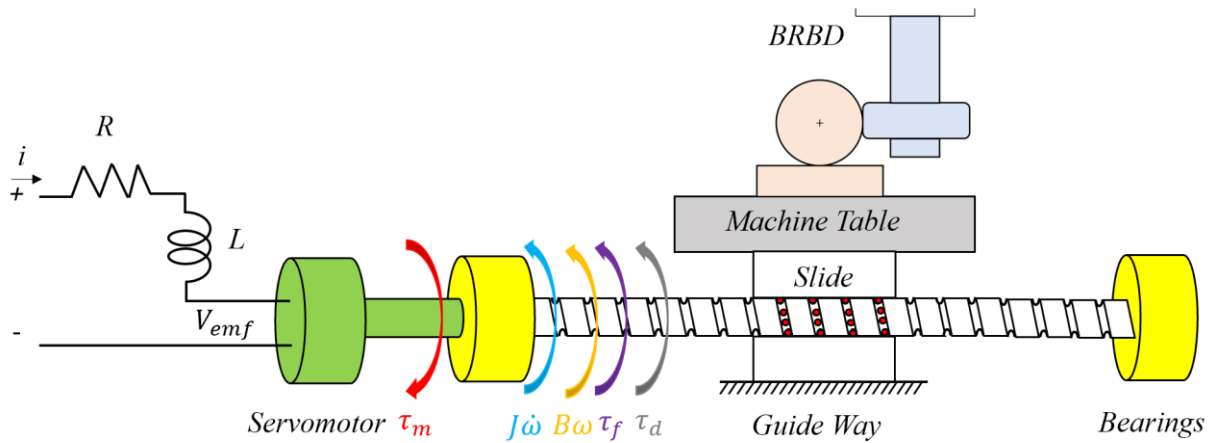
Schematics of applied torques through the machine tool feed drive during the BRBD test.
